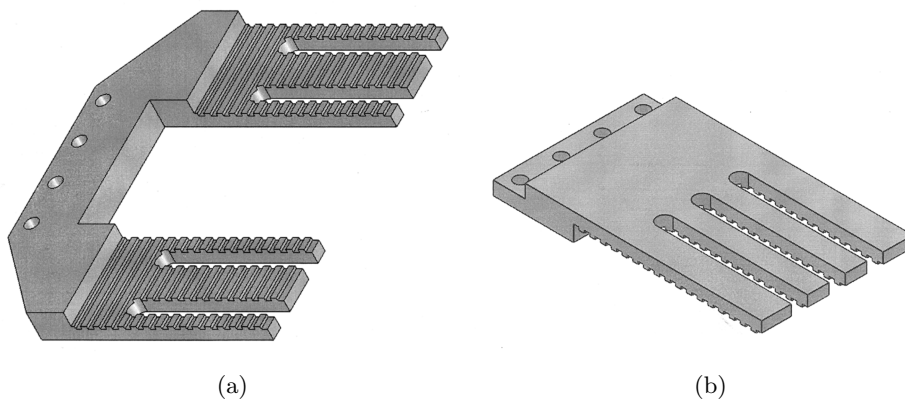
a) Bottom mounting plate two grooves either side slot onto screws in the chip rail, the central groove is to provide space for the atomic ovens. b) Top mounting plate, this slot onto three screws screwed into the top of the chip rail.
